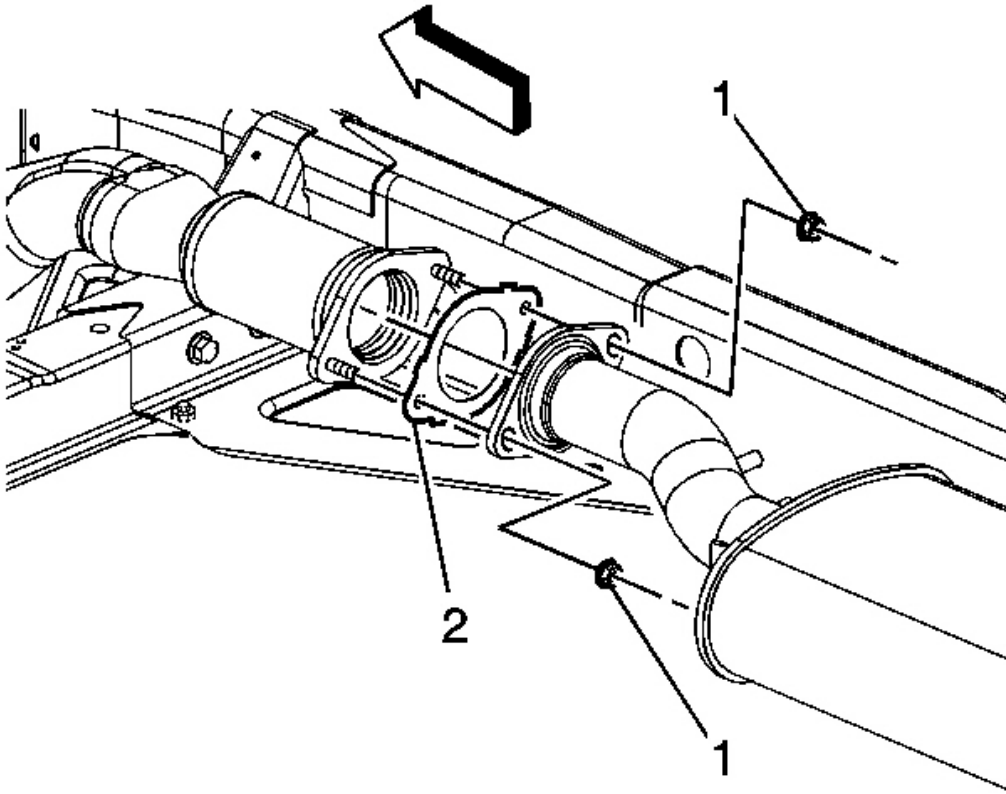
View Of Catalytic Converter, Muffler, Gasket & Nuts
